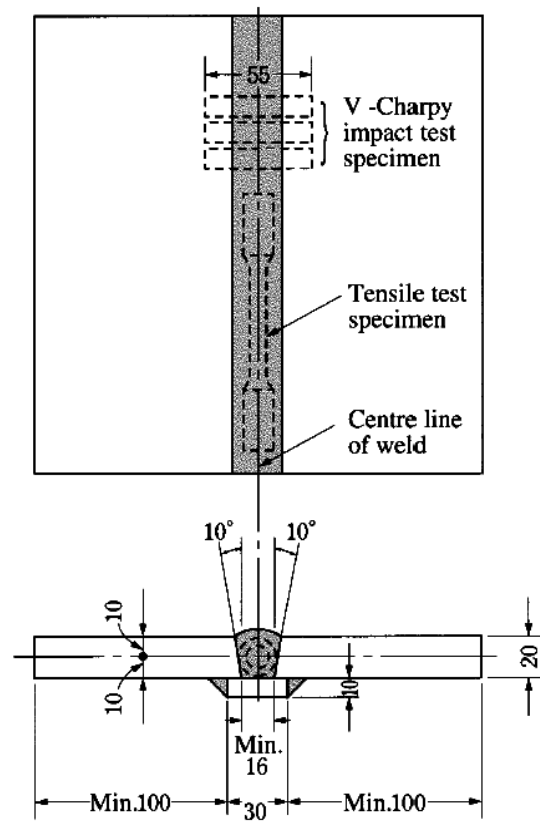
Butt Weld Test Assembly (Unit: mm)
